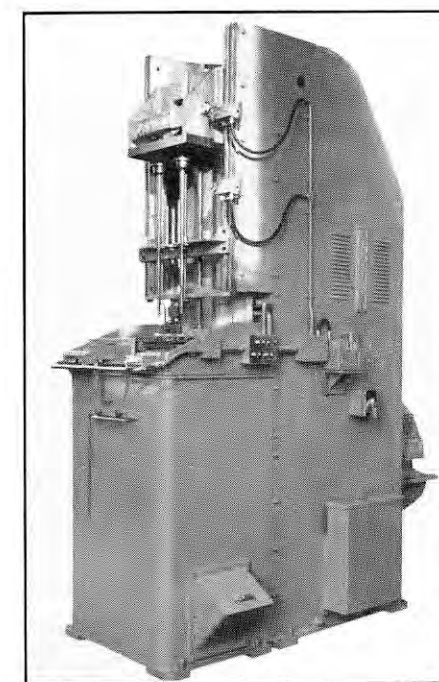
VERTICAL HYDRAULIC BROACHING MACHINE; LAPOINTE MACHINE TOOL CO., LTD.
